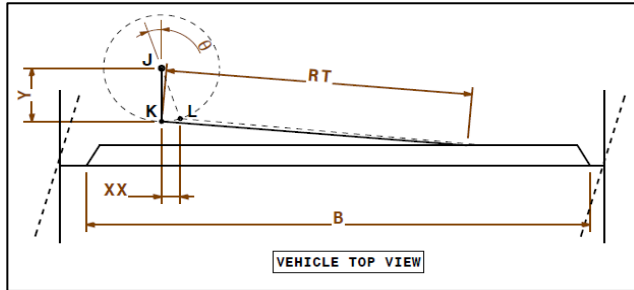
Schematic layout for pitman arm angle change in Y link steering mechanism - Vehicle top view
